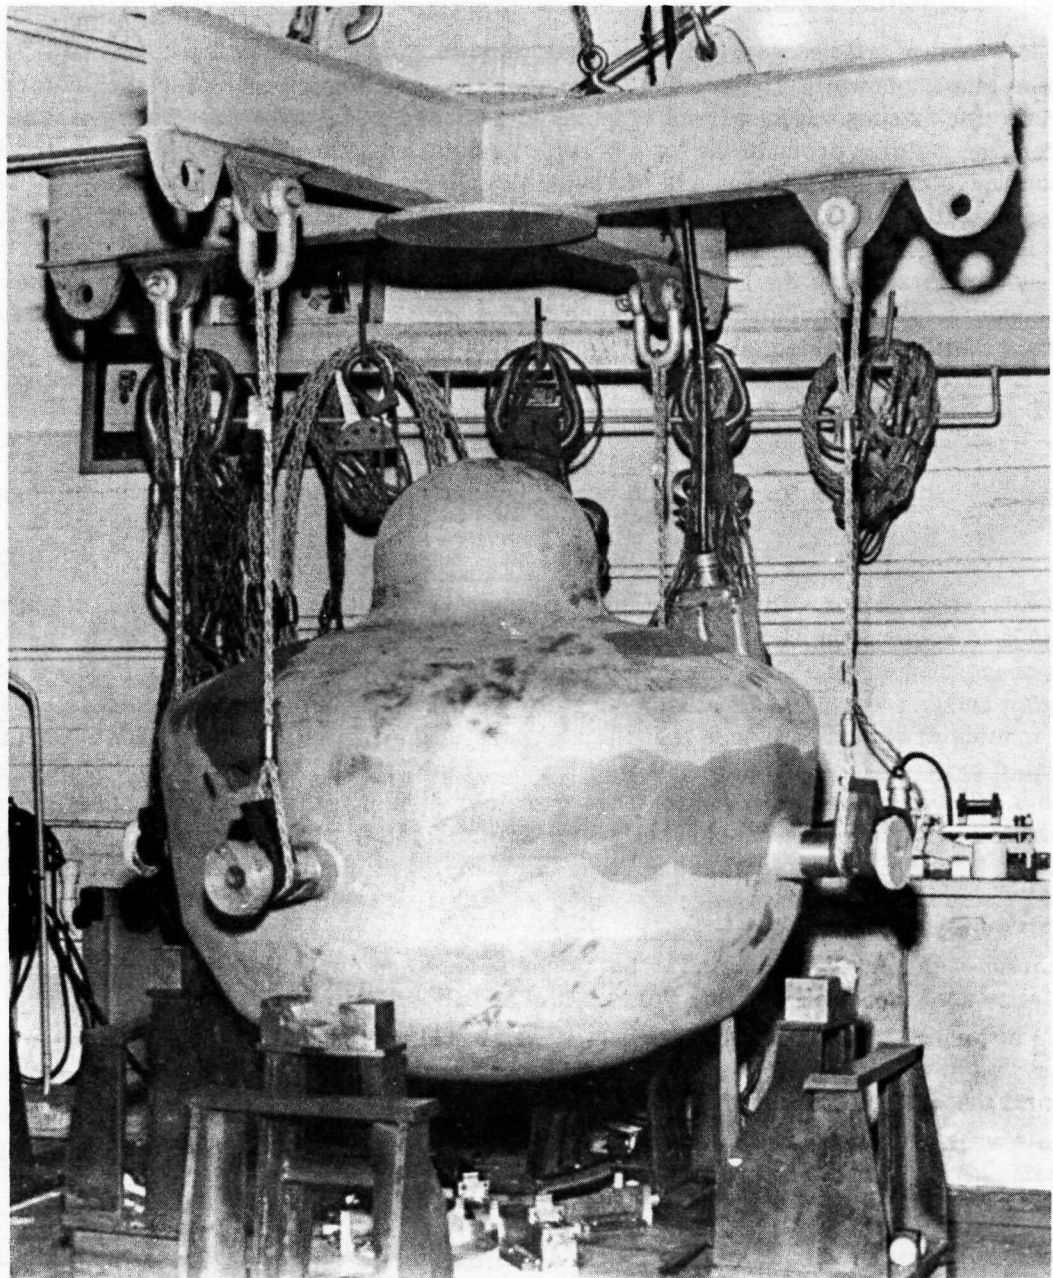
Insulated rear shield plug (Neg. U35877B)
